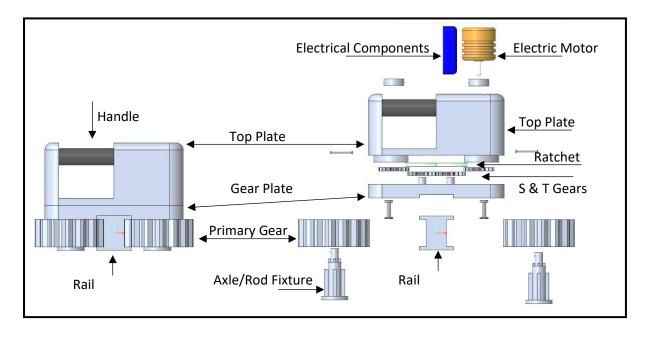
Front view of MURAGS in assembled and exploded views with labels
